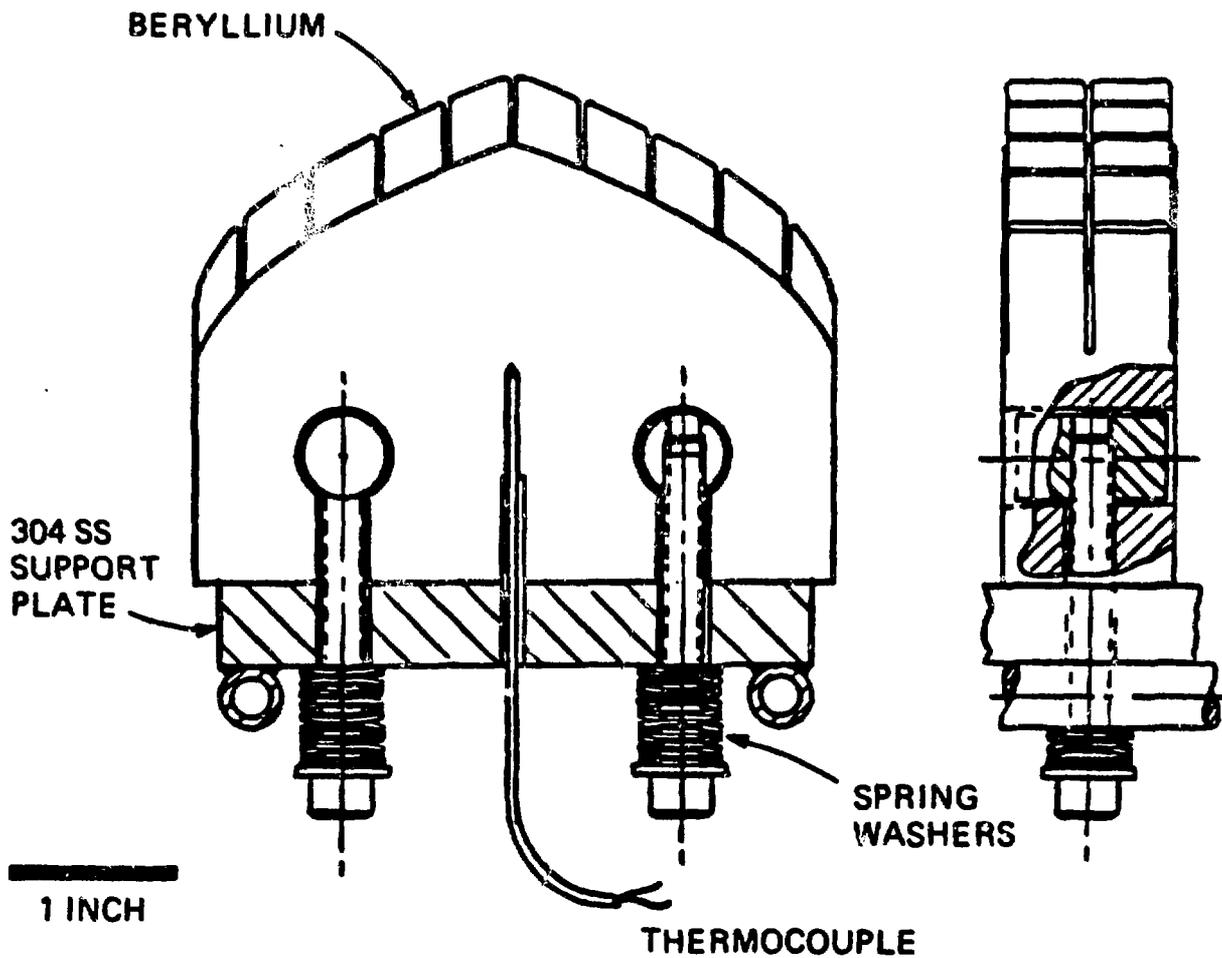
Drawing of tessellated beryllium limiter tile showing mounting details.
